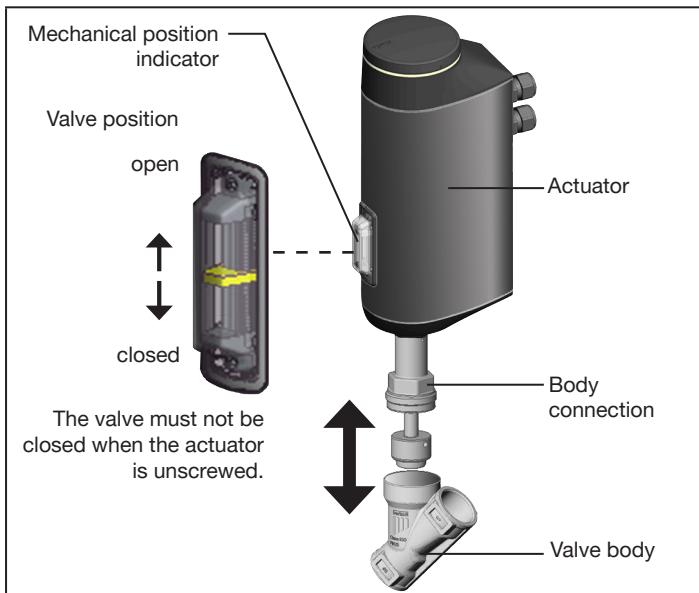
Installation of electromotive actuator (example angle seat control valve)
